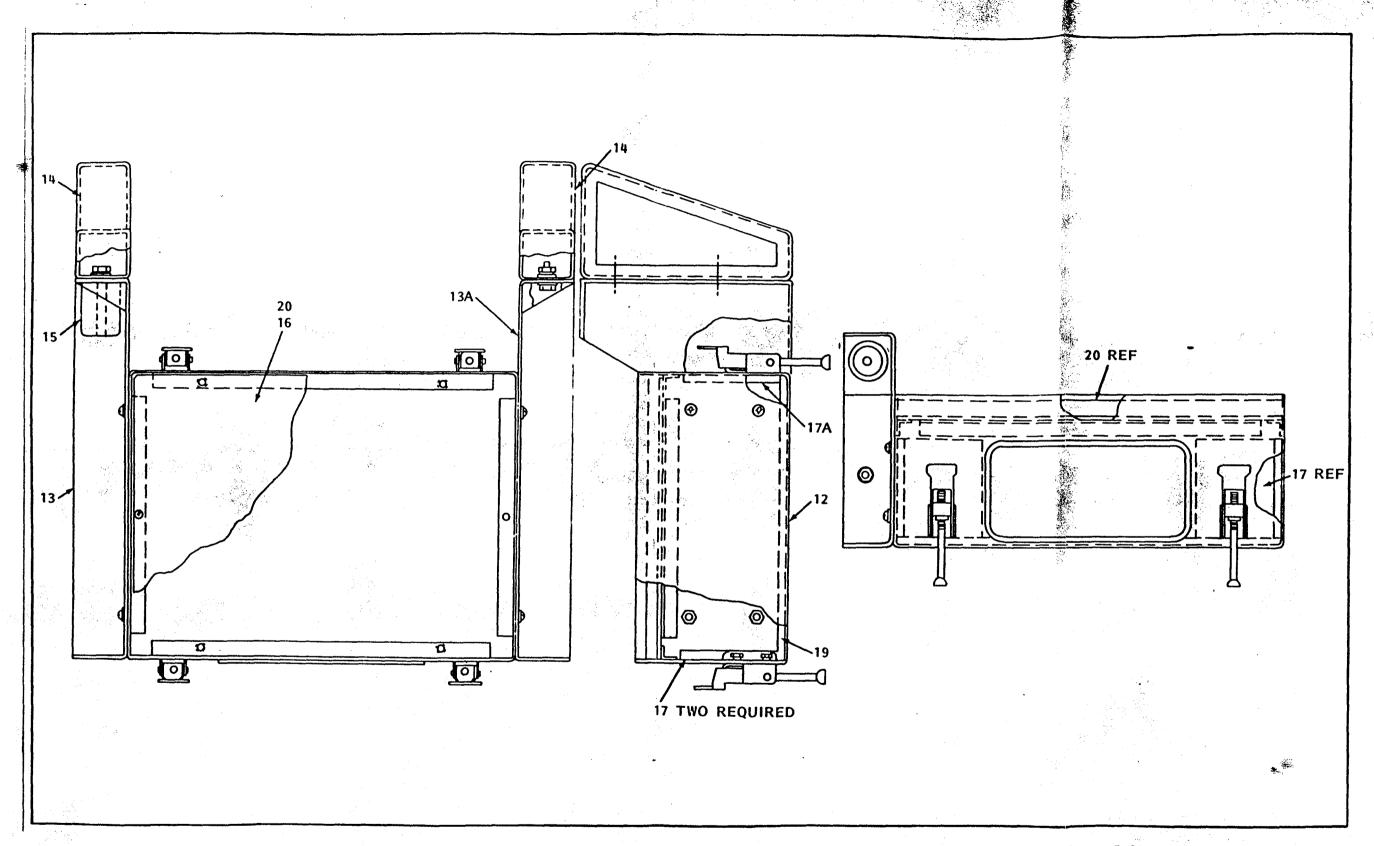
Base Assembly, Top View, Location of Components (Sheet 5 of 5)
